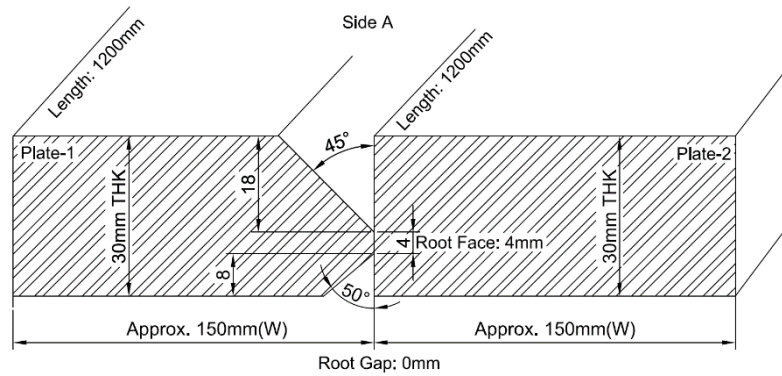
(b) K-Type Groove weld joint design for Steel H.
